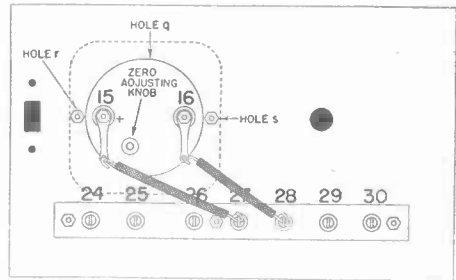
Rear view of front panel, showing how the meter and jack-strip are mounted and connected together for the experiments which are to be made before assembling the NRI Tester. The chassis is not shown in this view, but should be attached to the bottom of the panel according to instructions given in Step 2 of Experiment 11.
